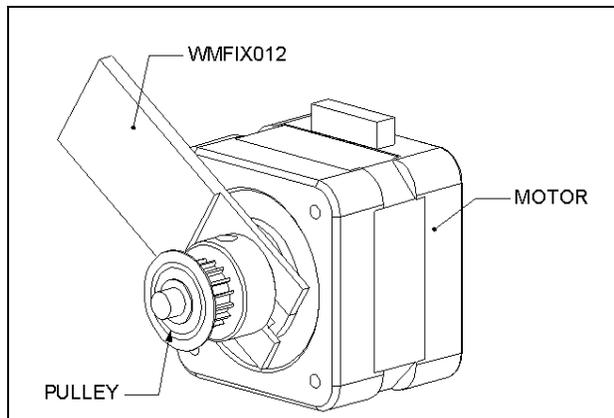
Positioning the Pulley on the X-Drive Motor
